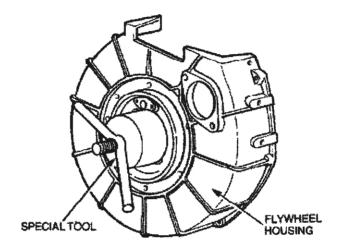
Crankshaft Support Bearing - Flywheel Housing
